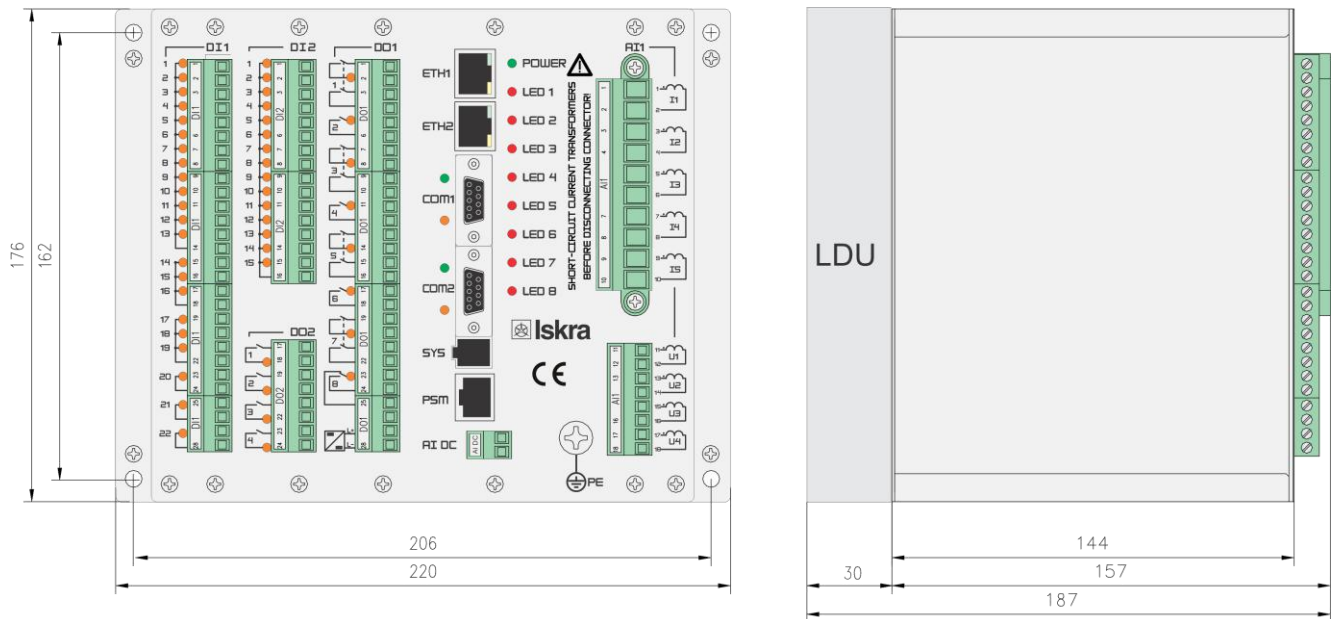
FPC 680 / CAU 380 - L1(4) device mounting dimensions
